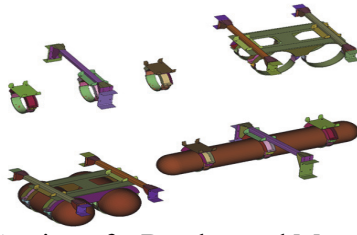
ISOMertic Section of a Bracket and Mounting for Gas Cylinder
